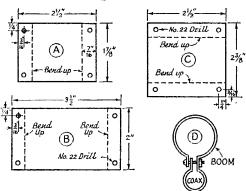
Dimensions of aluminum plates used to make the assembly clamps in the v.h.f. arrays. Sheet metal should be 3/64 inch or thicker. Two A-type clamps are needed for joining 1/4-inch tubes at right angles. One B and one C are needed to mount a 1/2-inch element on a 1/4-inch boom. The "figure 8" clamp, D, made from a 1/2-inch wide strip approximately 6 inches long, is used to ground the coax to the boom, and keep it in a fixed position with respect to the driven element.
